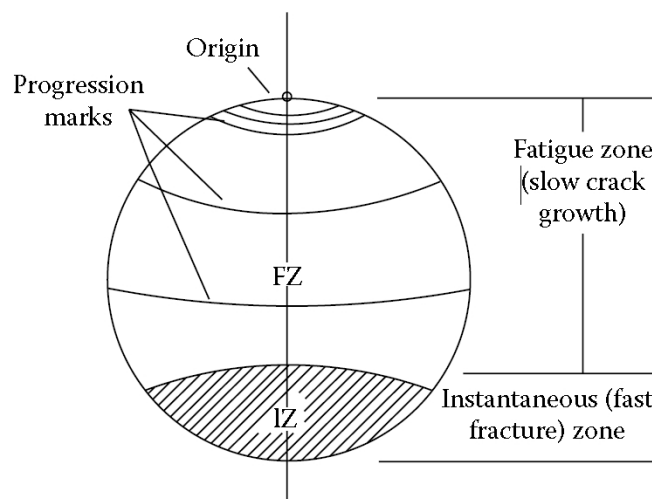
A view of a basic plane bending fatigue failure [135].
